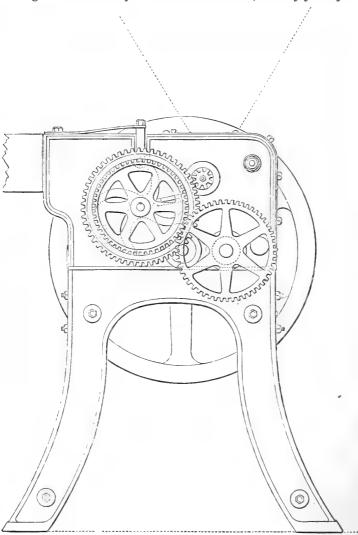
(p. 695) gives a front view of the machine, showing driving pulleys,
